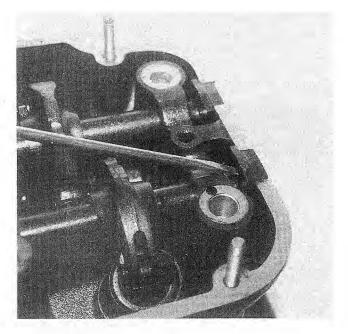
Rubber retaining plug being removed from cylinder head.
